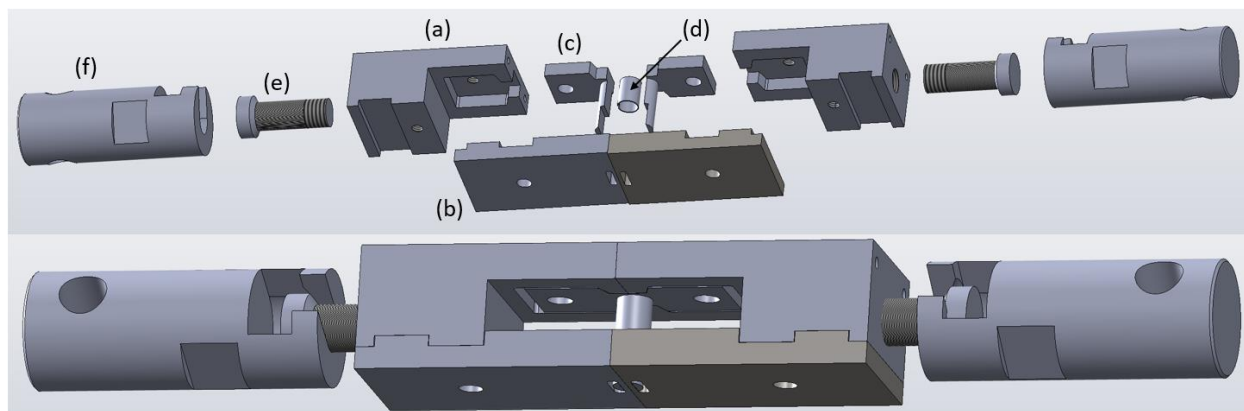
The exploded view (top) and assembled view (bottom) of the PST fixture showing the six main fixture components: (a) main grip piece, (b) lid, (c) mandrel insertion, (d) test specimen, (e) screw, and (f) screw-to-intron conversion piece. Despite the complex appearance, the fixture is easy to operate in the remote mode.
